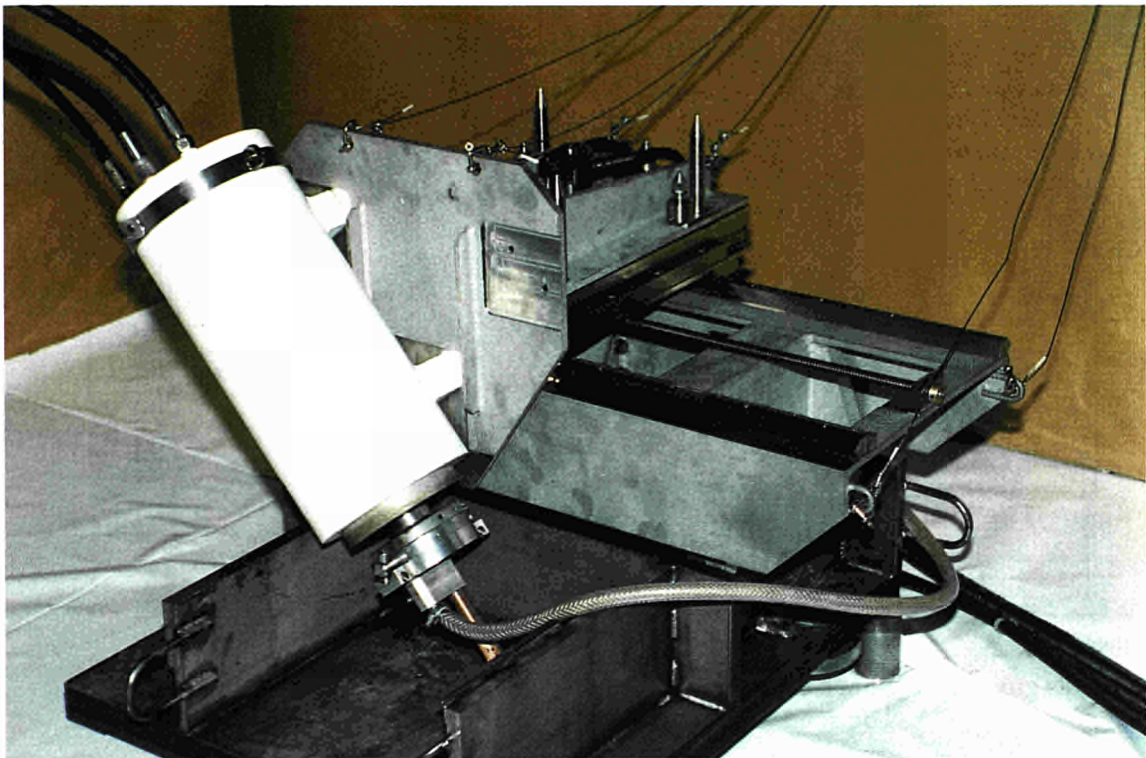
Cold testing of Electro Discharge Machining on a mock-up of the uppermost internal plate
